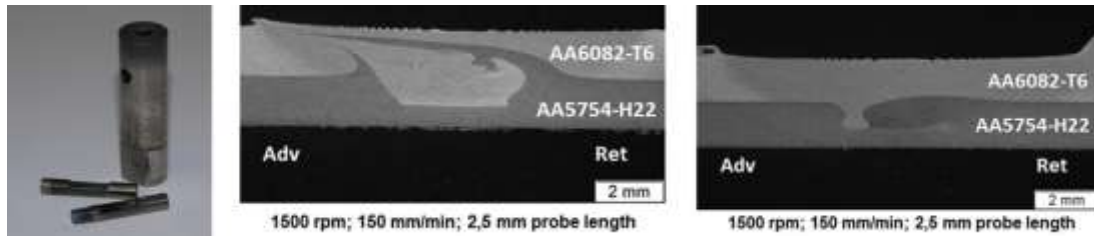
Threaded and non-threaded FSW tool-probe designs (left) and macrosections of FSLW joints produced using the same welding parameters but different tool-probe designs (right) [70].
